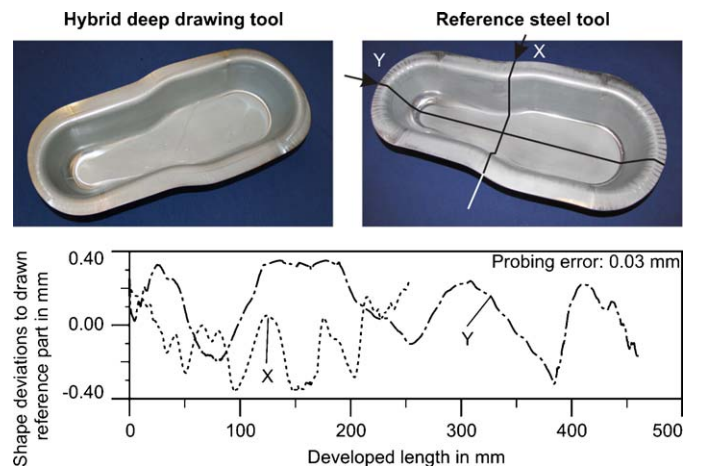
Sheet metal parts drawn by hybrid and reference steel tool.
